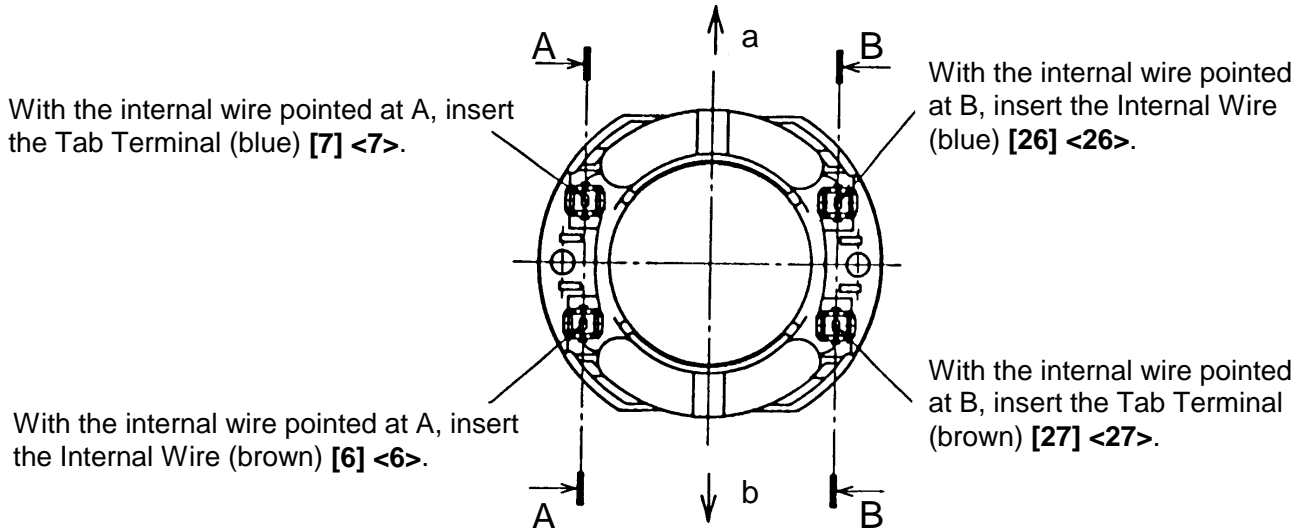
Internal Wires Assembly Positions (View from Commutator Side)
